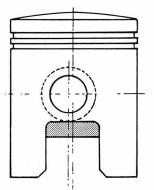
The shaded section shown should be removed up to the piston pin boss. Be sure edges are rounded.
